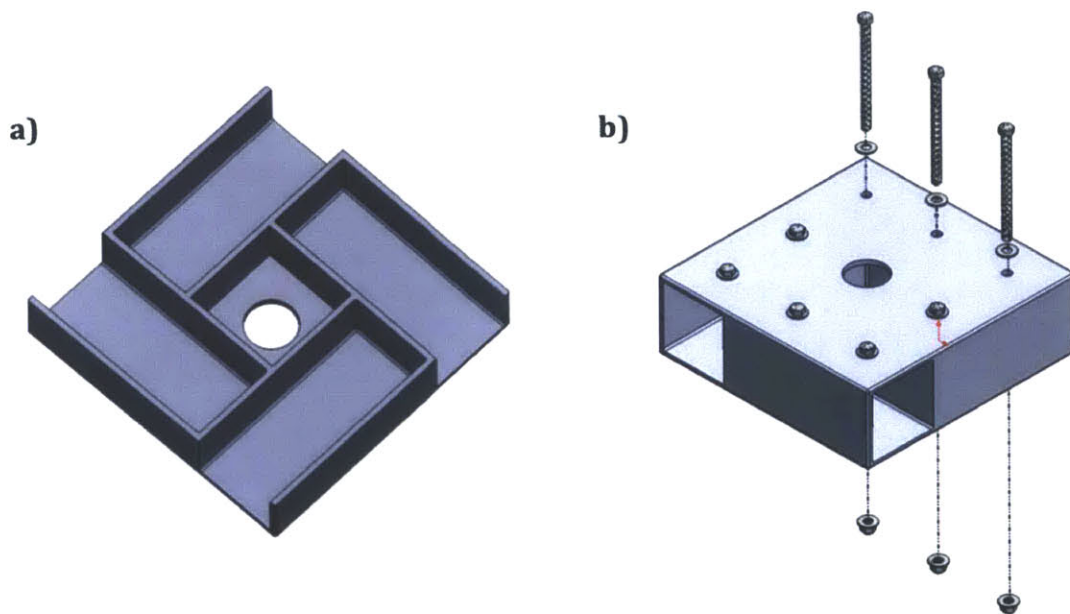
CAD design of welded steel rotational cage. (a) The original design required welding all of the side plates to the base plate and (b) attaching a top cover using bolts (not pictured) in order to make welding possible.
